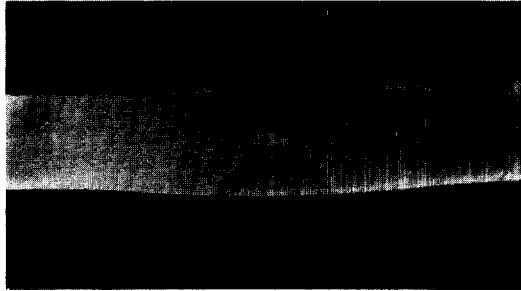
Weld pool shape of butt joint (×1.5)
